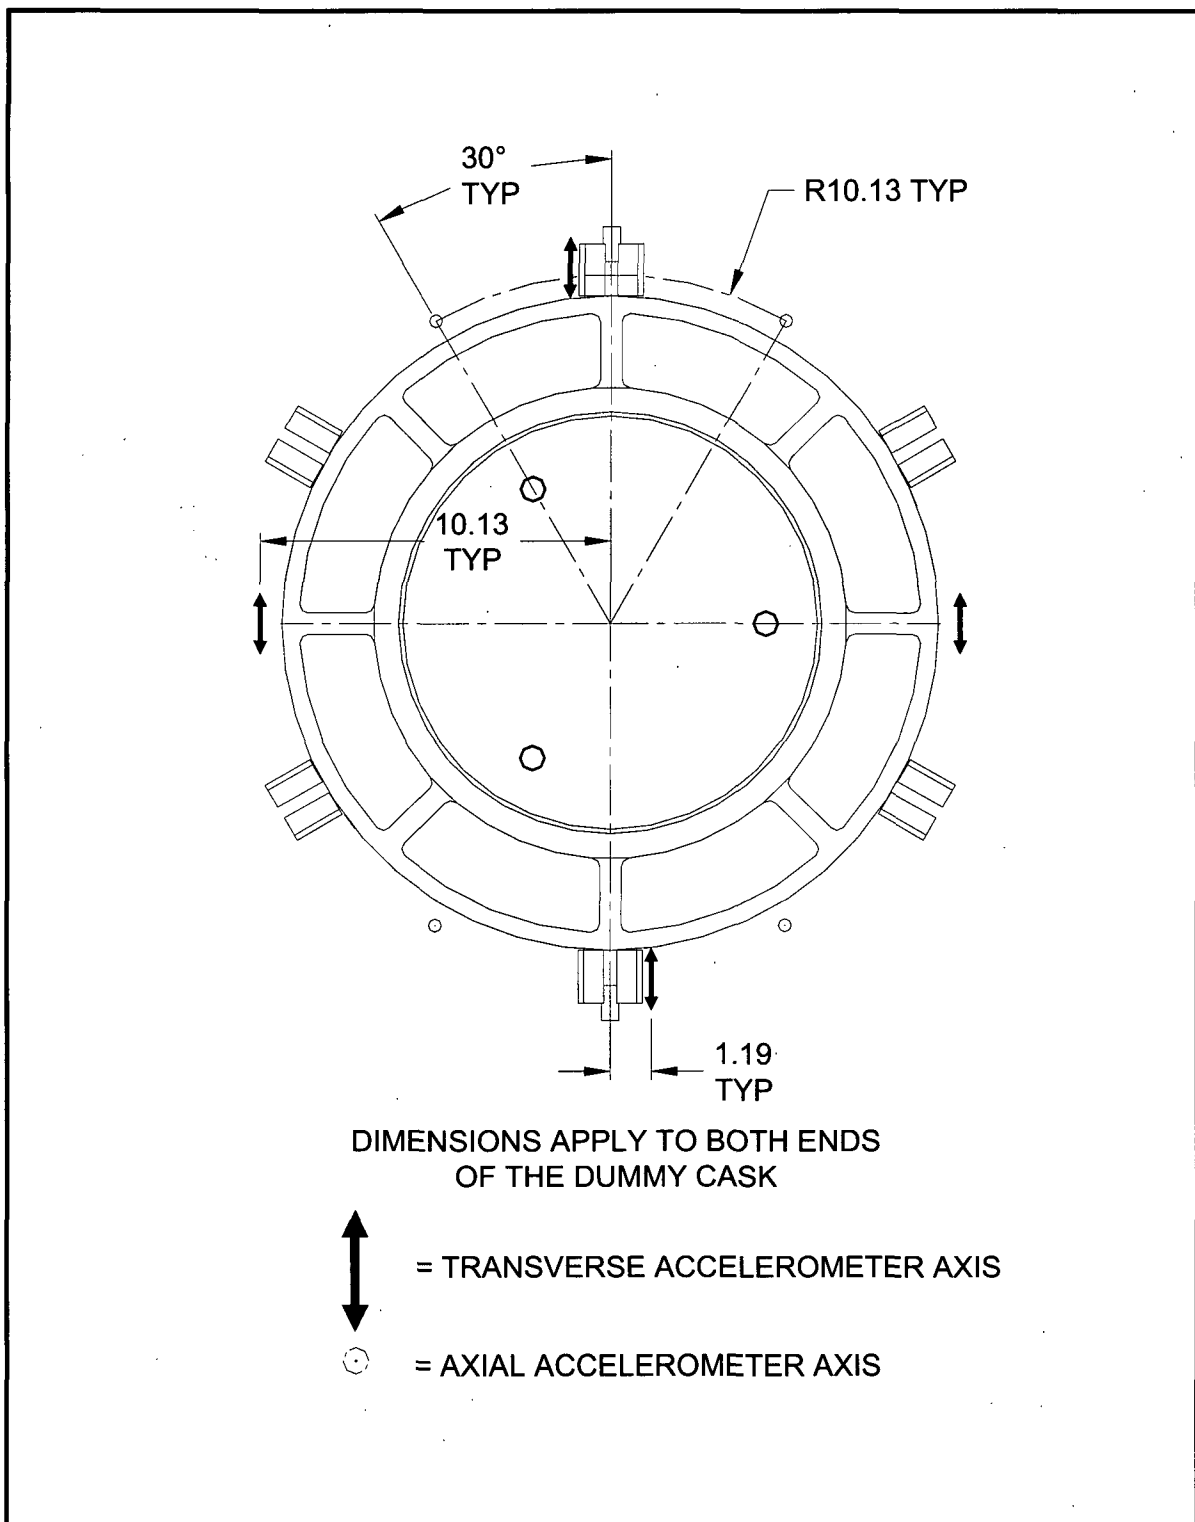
Accelerometer Mounting, Top View
